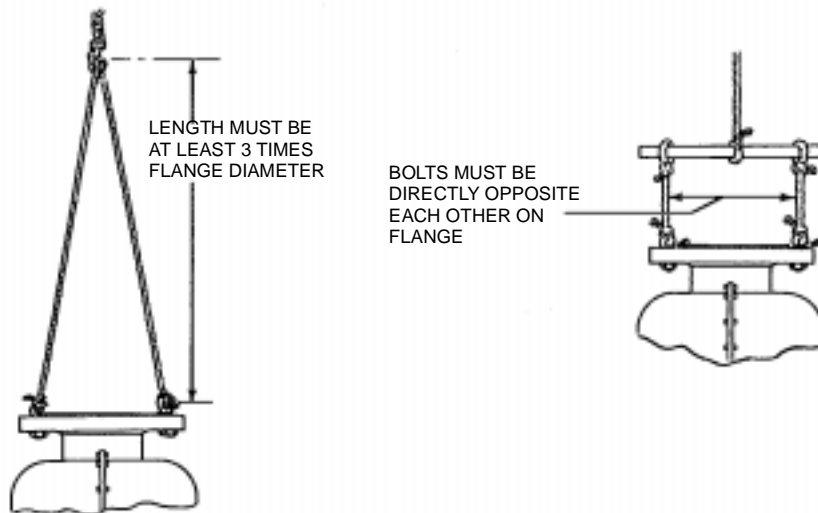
Lifting Flanged Flowtube for Horizontal Mounting (1/2- to 12-in Size Shown)
